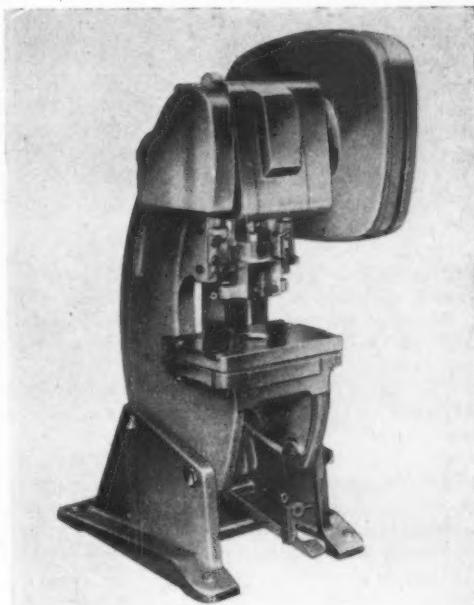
Bliss 25-ton Inclinable Flywheel Press
